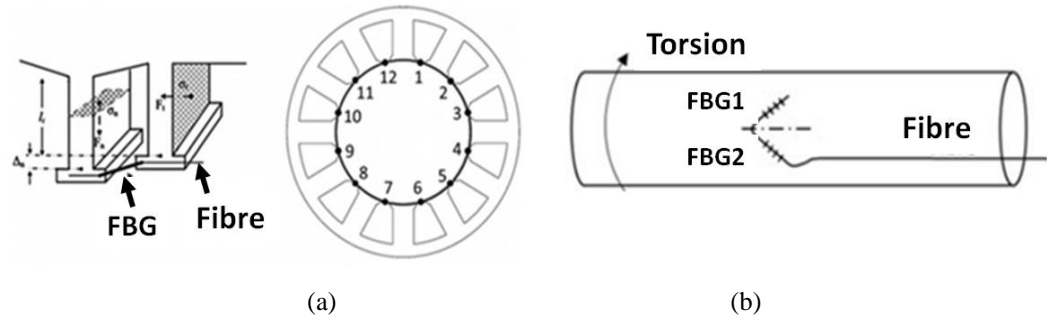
a) Strain measurement in stator teeth, b) torque measurements in rotor shaft
